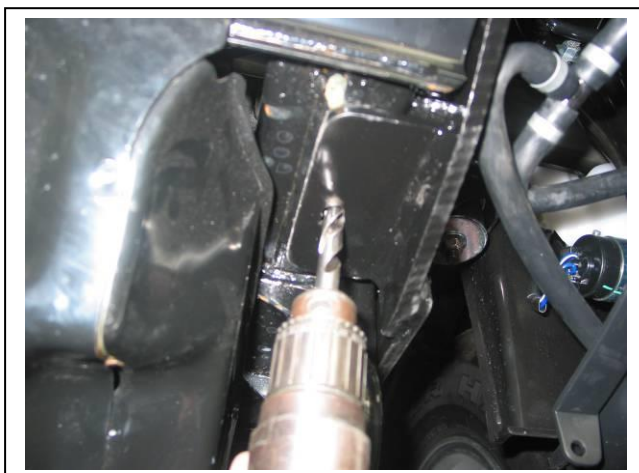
Drill 10 mm hole using mount as a guide in underside of chassis rail.
